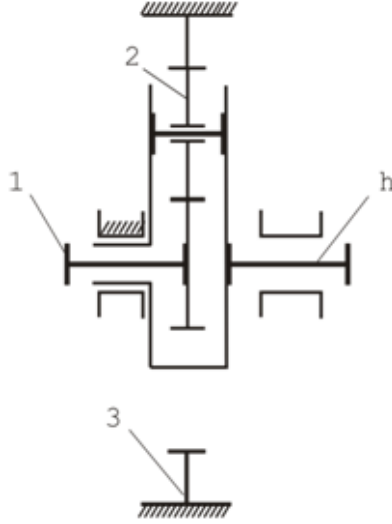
Basic type of planetary gear train (1 – sun gear; 2 – planet; 3 – ring gear; h – carrier)
